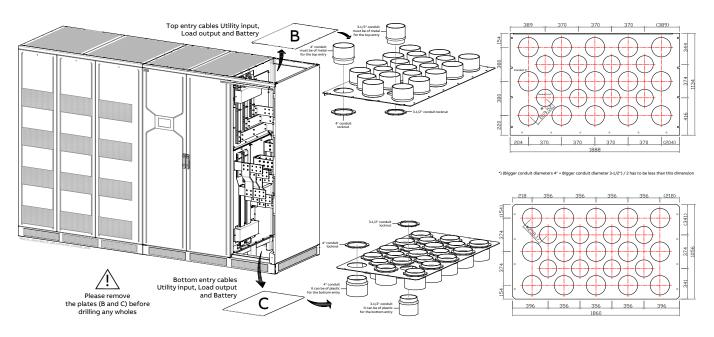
MegaFlex 1000 to 1600 - Cable conduits entry
